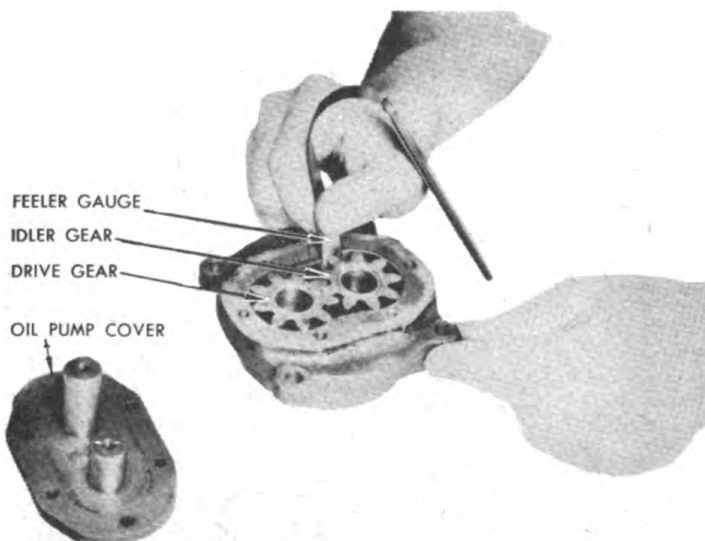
Checking Oil Pump Gear Clearance to Pump Case.
